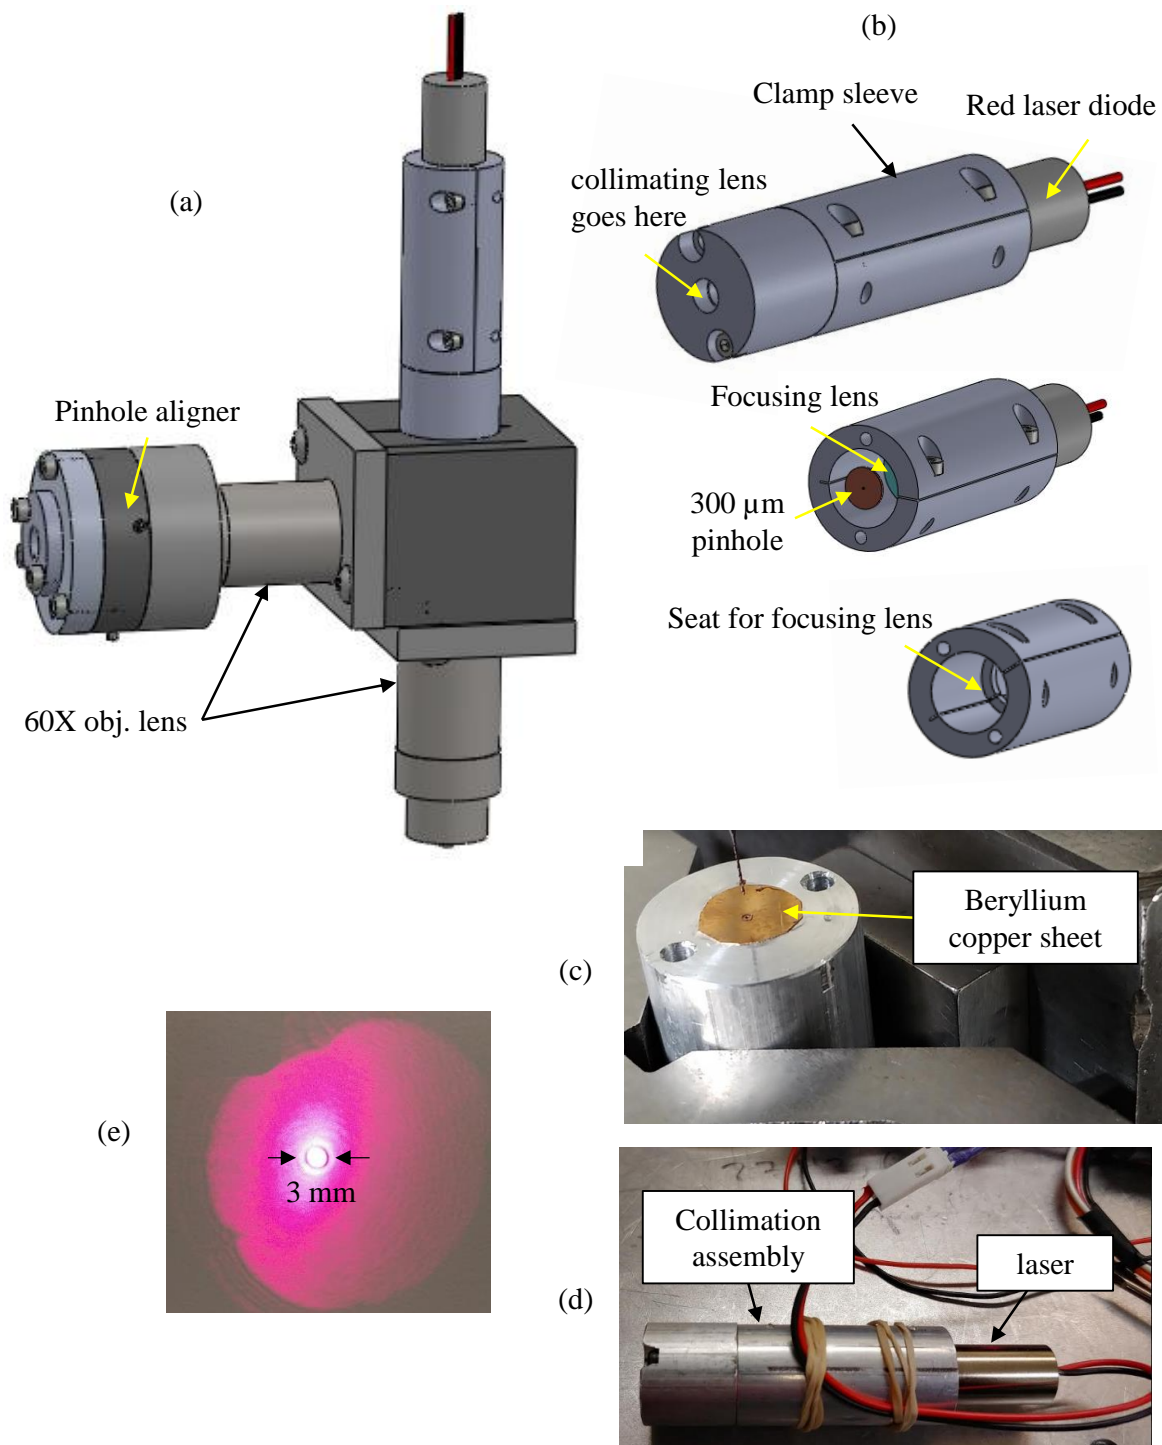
Fourth prototype using a 30 mW red laser with a pinhole; (a) Solid model of the new prototype (b) solid model of the collimating assembly showing the clamping sleeve for the laser, 300 μm pinhole, and the focusing and collimating lenses (c) drilling the 300 μm pinhole on a Beryllium copper sheet epoxied to the back of the cylinder that contains the collimating lens (d) fabricated collimating assembly (e) collimated beam of about 3 mm diameter
